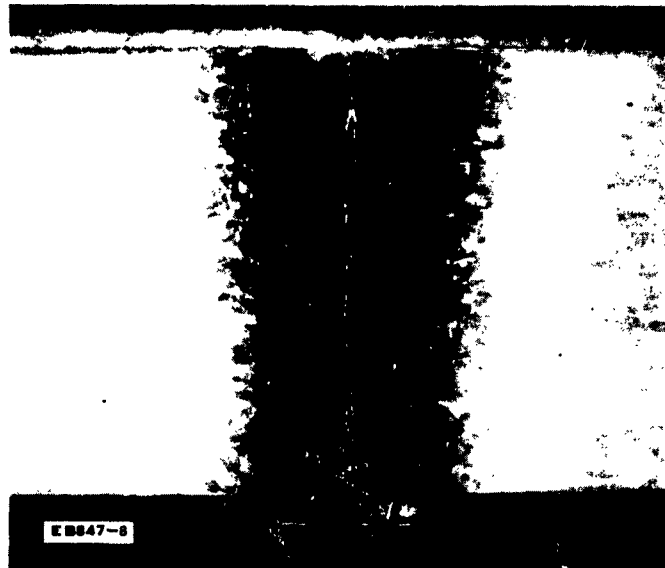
Trial Weld Cross-section; X20; 0.125-inch B120VCA Ti; 150 KV, 10 ma, 50 ipm
